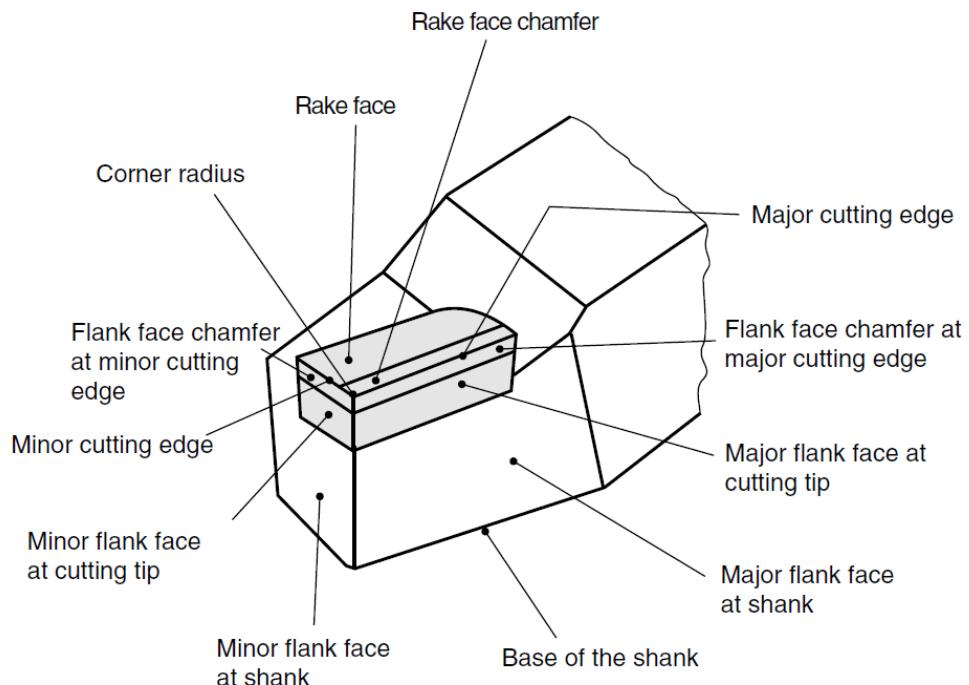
Geometrical element of a turning tool according to DIN 6581 [17].
